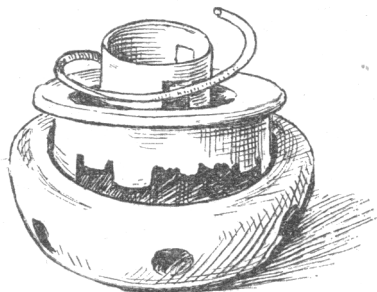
Showing corrosion of button and loosening of the wire spring.
